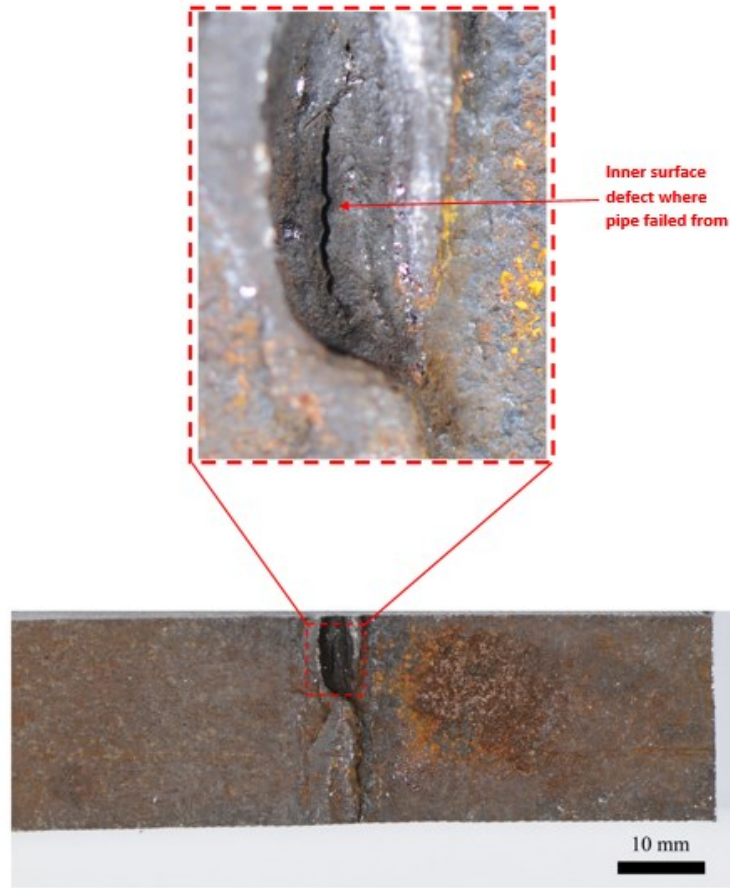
Inner surface defect which extended into the wall thickness and led to premature failure of test 8
